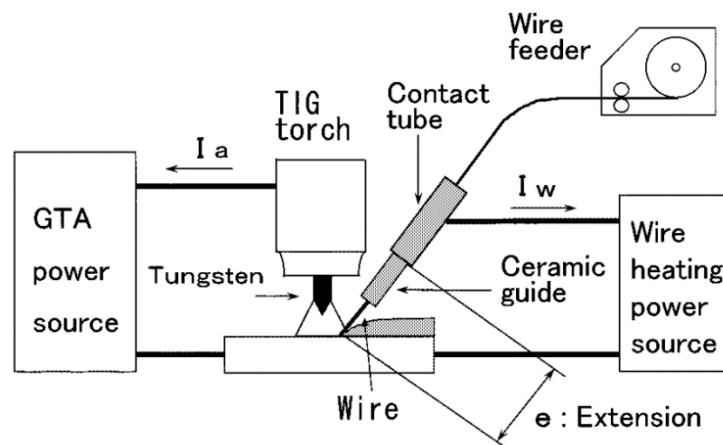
Schematic illustration of hot-wire TIG welding [135].
